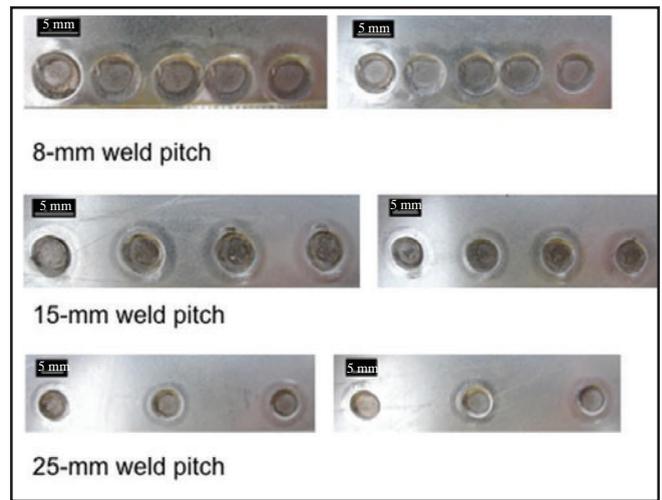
Welded coupons of 1.2-mm HDG steel sheets, without (left) and with (right) the plastic insert of 8-, 15-, and 25-mm weld spacing.
